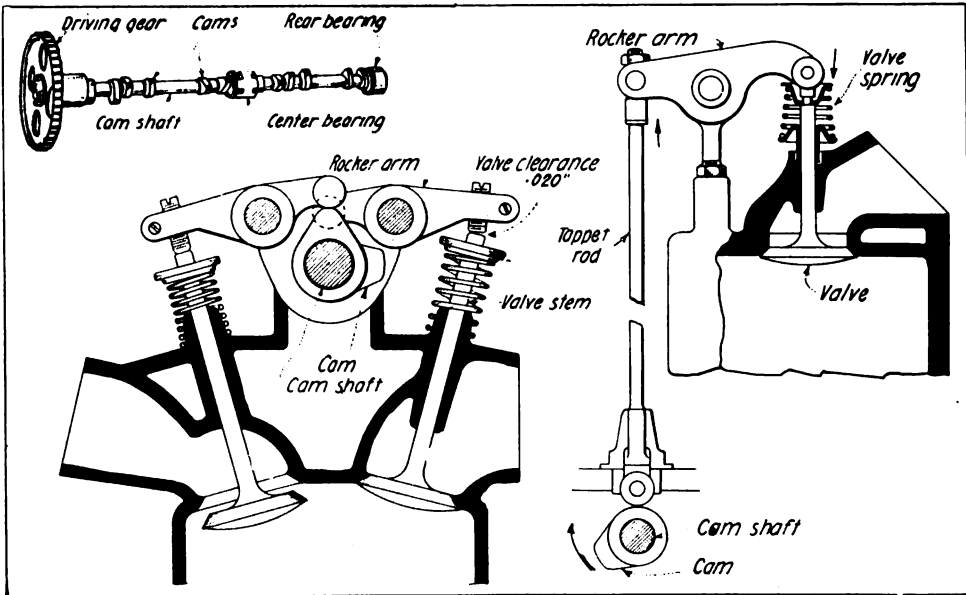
(upper left)—Camshaft, showing the driving gear and cams
